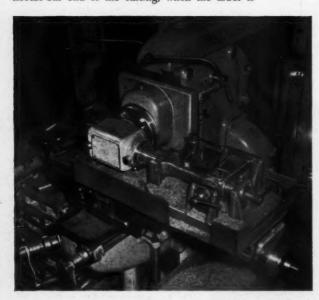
Another internal milling operation, within the needle-bar end of the arm casting, is performed on this Enshu machine, which is fitted with a special right angle attachment made by Mitsubishi. One operator only is required to supervise this machine and the unit seen in Fig. 2
